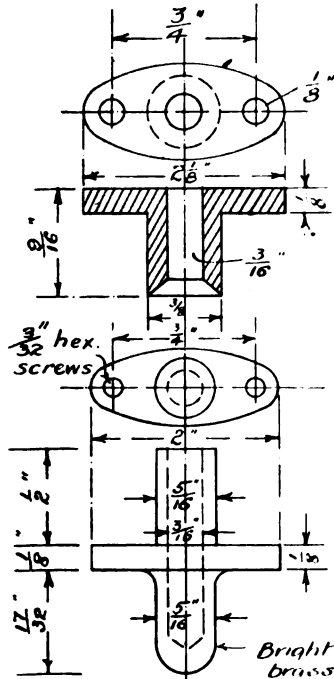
REGULATOR VALVE SPINDLE GLANDS.
